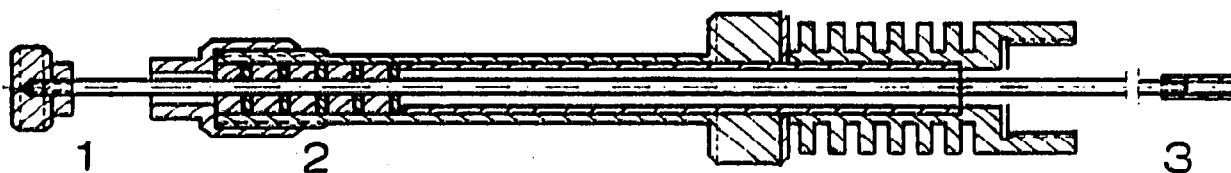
Solid sample injector. 1 = Stainless-steel rod going through gas-tight Teflon O-rings (2); 3 = holder for material to be analysed.
